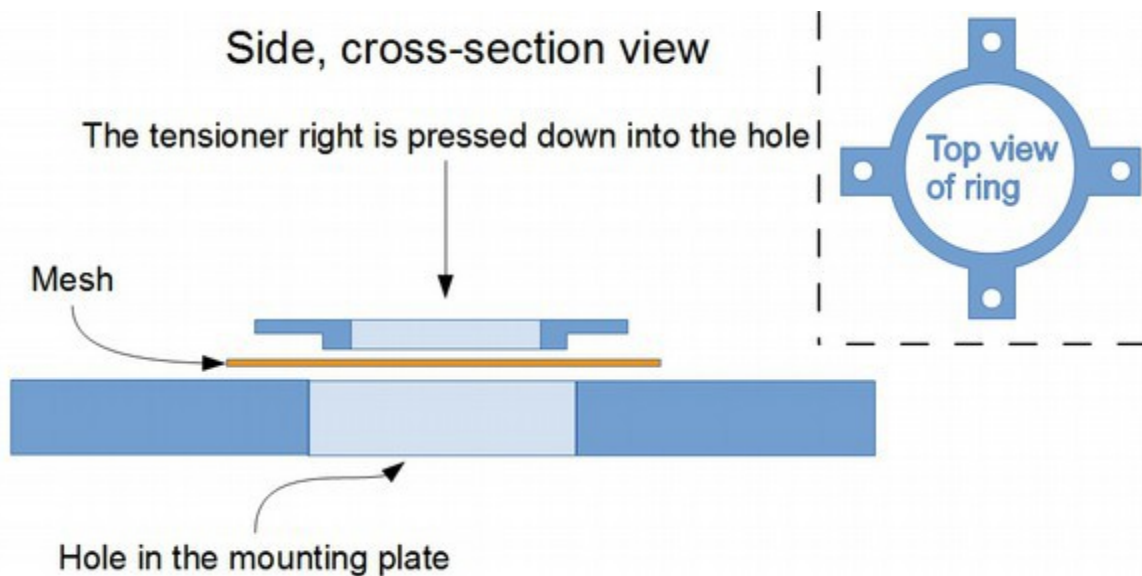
The wire-mesh tensioner ring concept. Pressing this ring into the mounting plate hole would stretch the wire-mesh, and force it to be flat.
